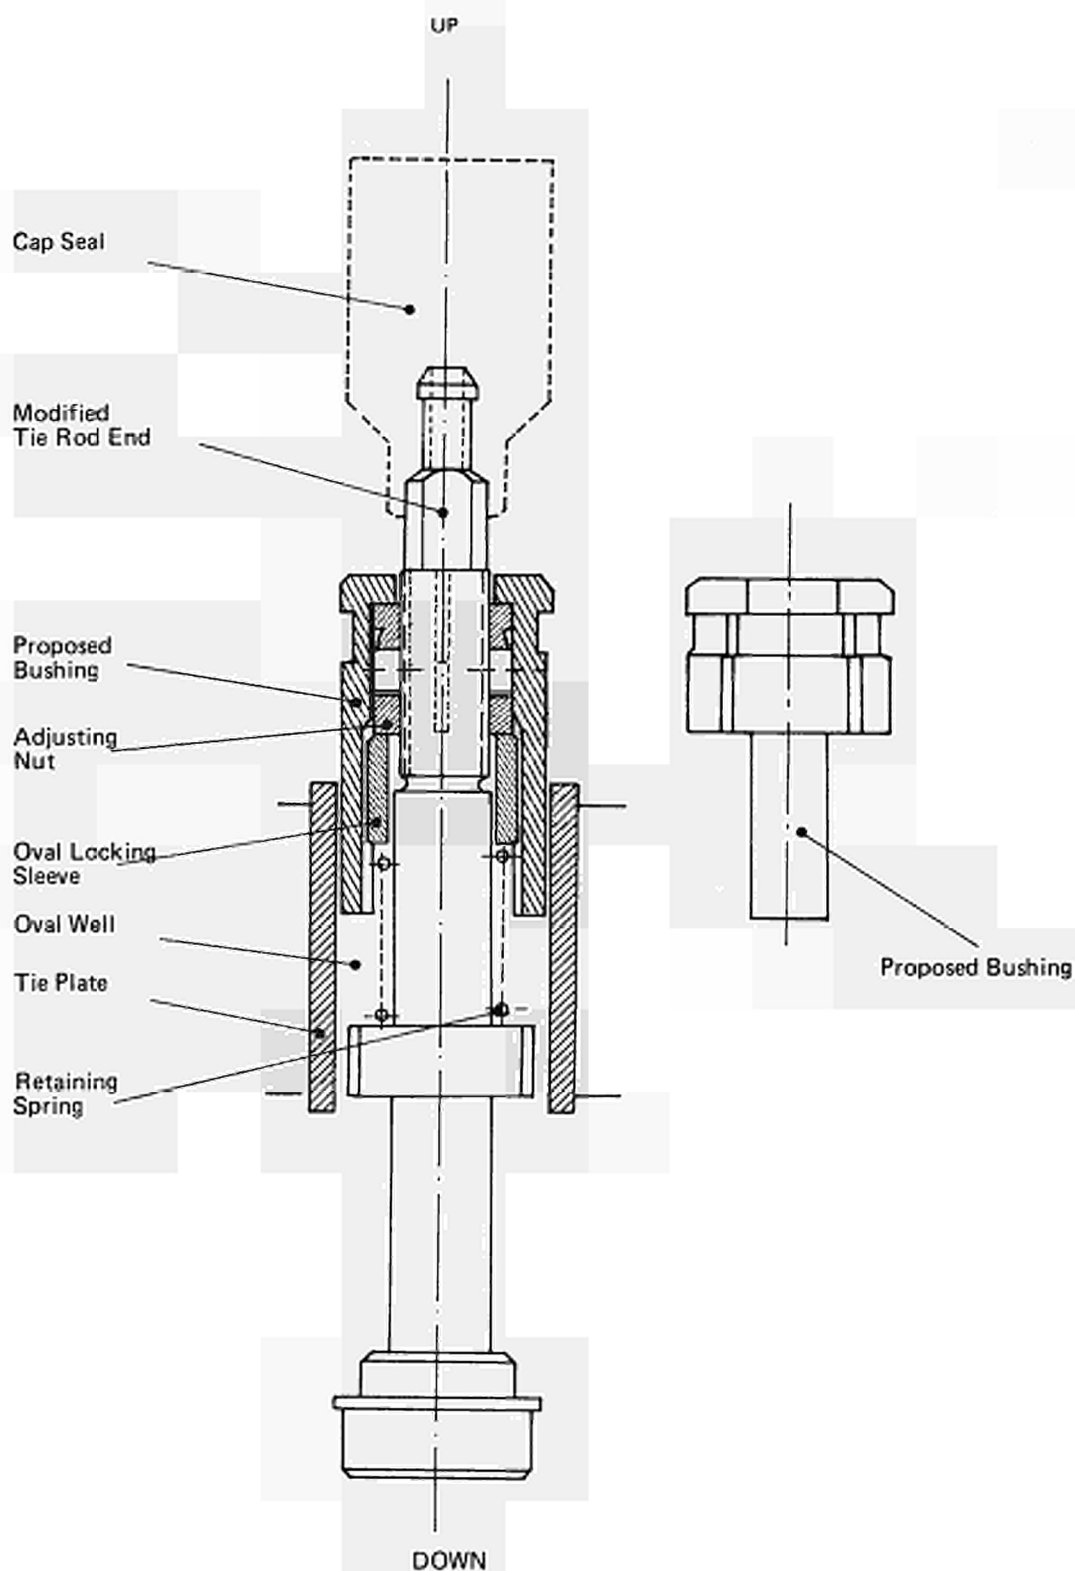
GENERAL VIEW OF THE LOCKING DEVICE OF THE UPPER END CAP TIE ROD
